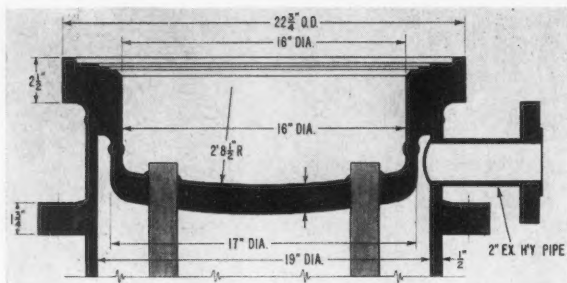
Case 2. Top tube sheet design of AISI 347 waste heat boiler which failed in 6-8 months due to thermal-corrosion.
